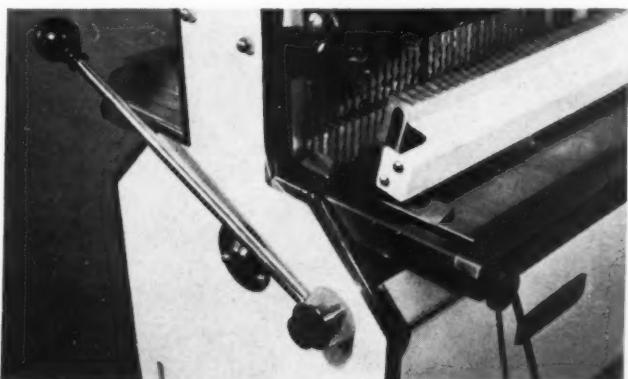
The rocker, end view of which is shown in Fig. 3, is supported at the ends by two ball bearings
